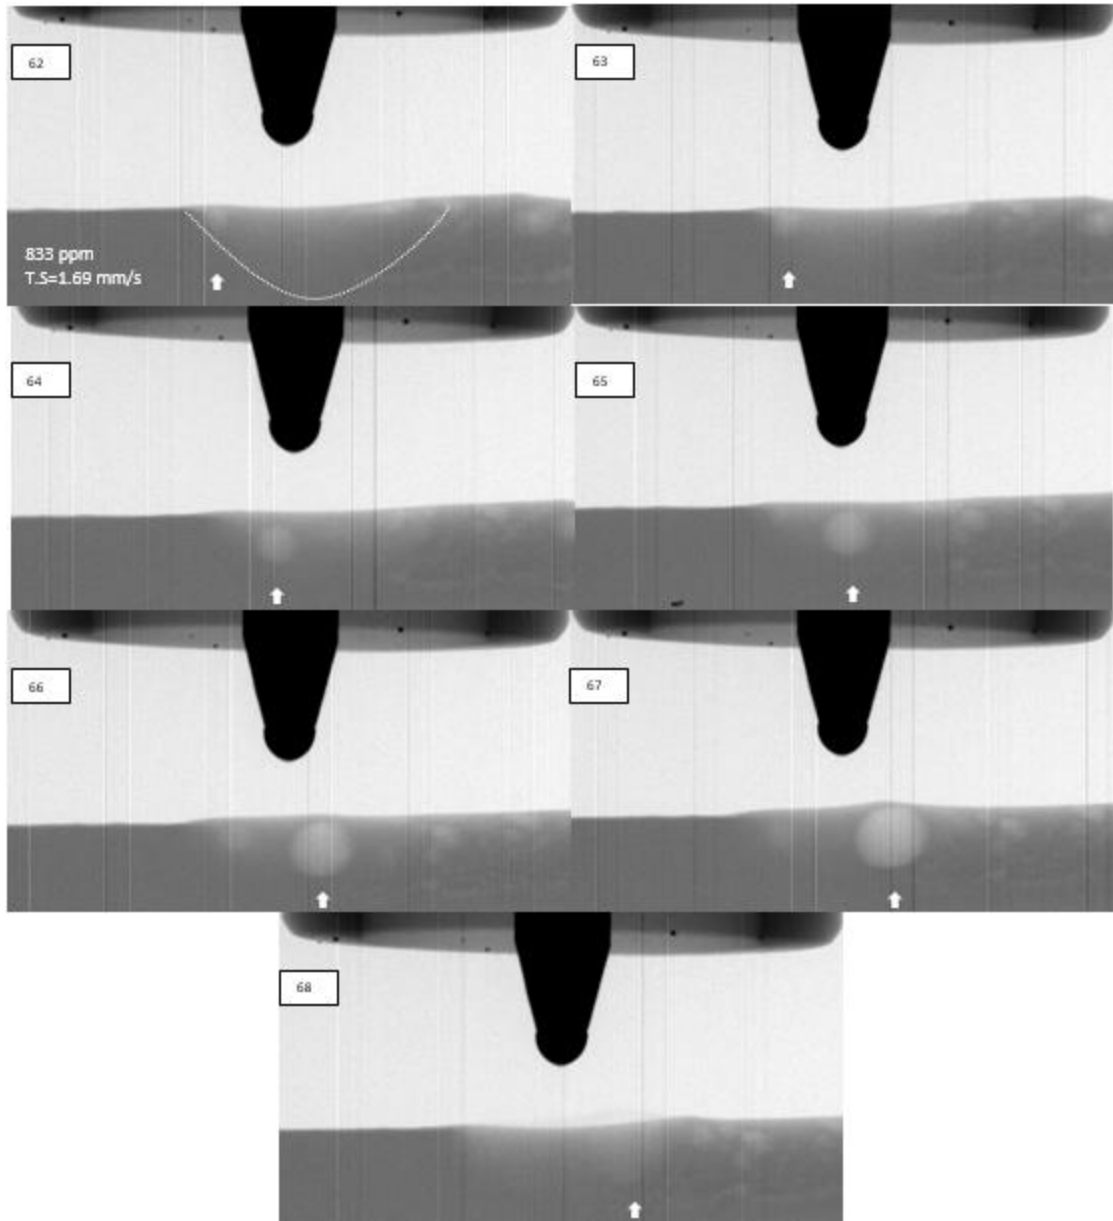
Alloy 6061 welded using 833 ppm of shielding gas hydrogen at 1.69 mm/s.
